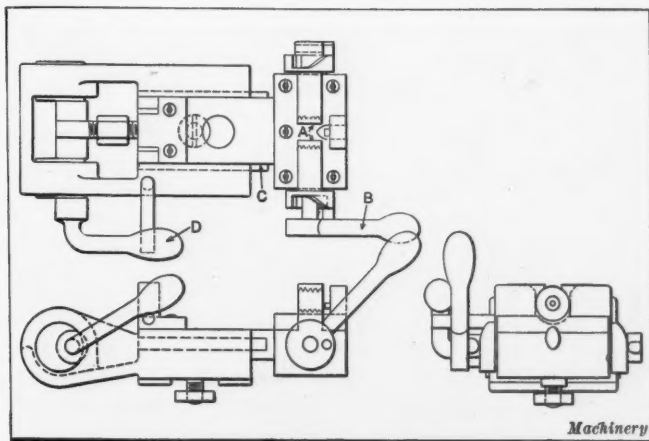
Fixture for Use in drilling Deep Holes on Machine shown in Fig. 47
